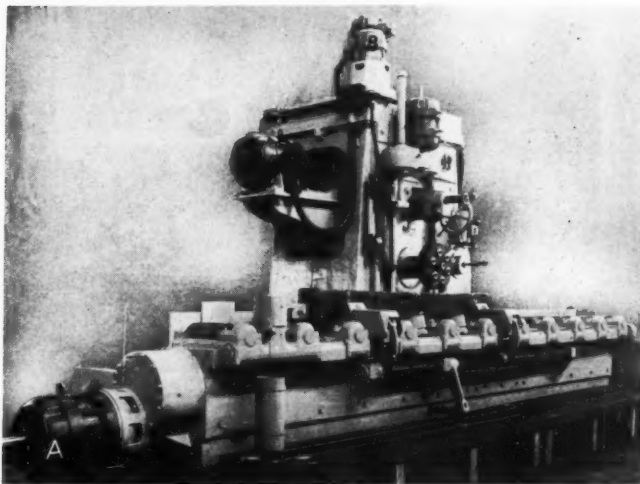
Two-speed motor designed for quick and frequent starting drives the carriage
